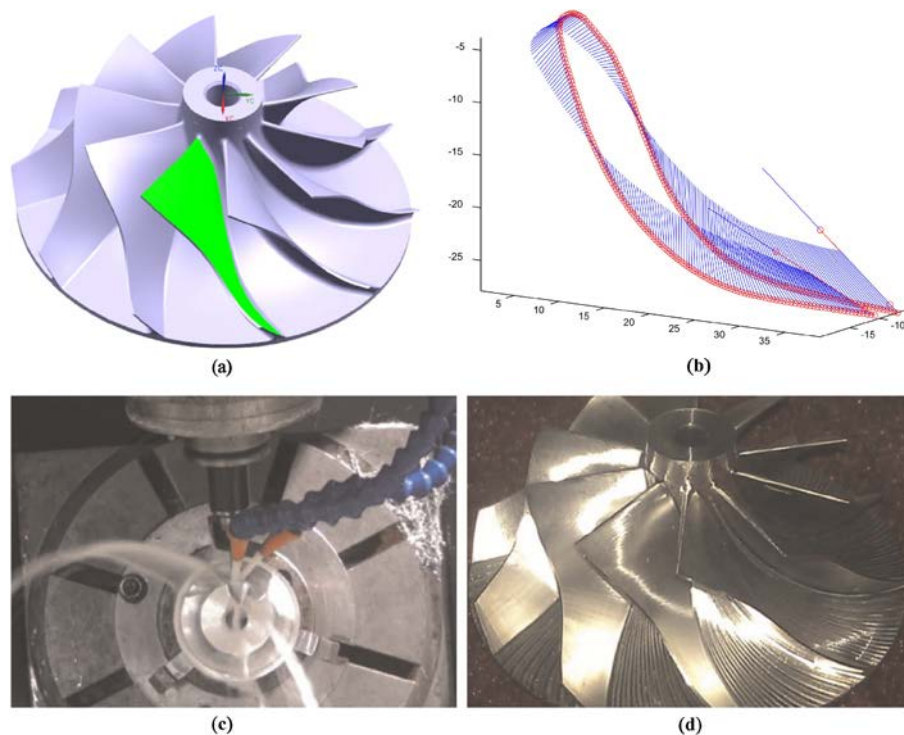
Corner smoothing used in five-axis machining of an impeller⁴². (a) Impeller model used in real machining; (b) Tool path after smoothing the corners in tool tip position and tool orientation; (c) Machining process of the impeller; (d) Machined impeller after using corner smoothing.
